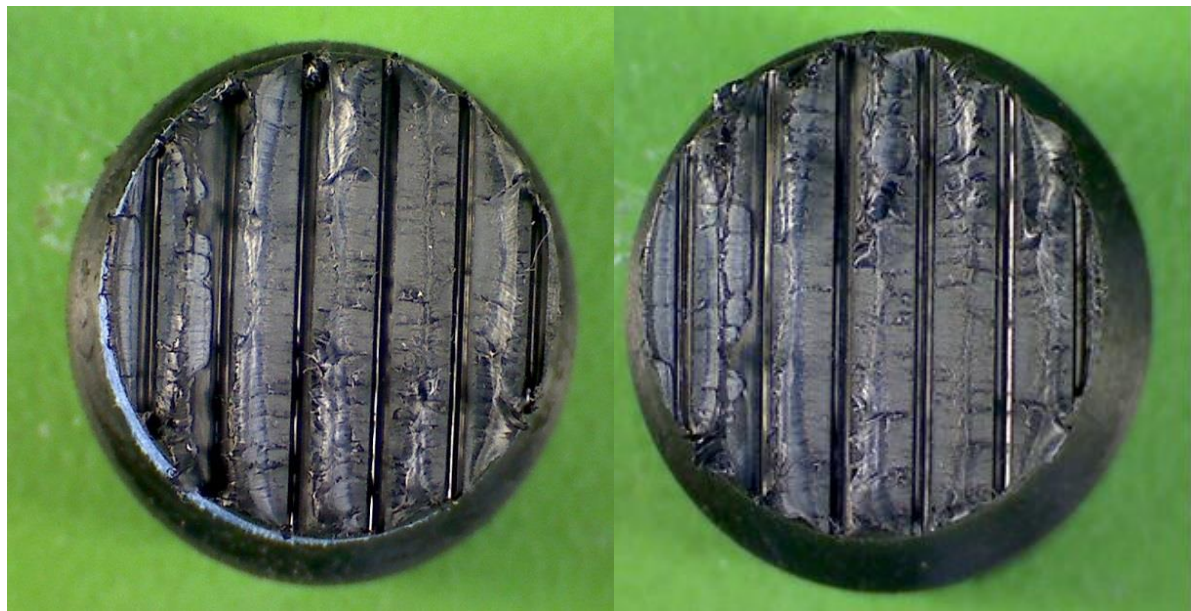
Typical fracture surface of an EF tensile creep rupture test specimens where rupture has occurred in the plane of the heating wires.
